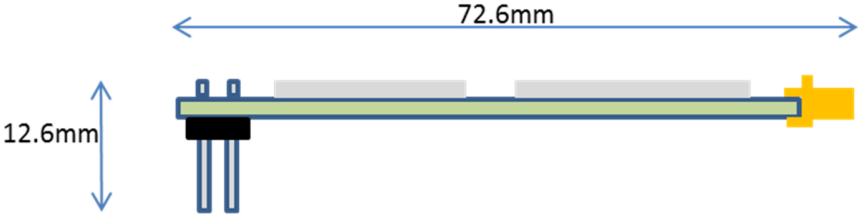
Mechanical size of RHF0M301 (Side View)
